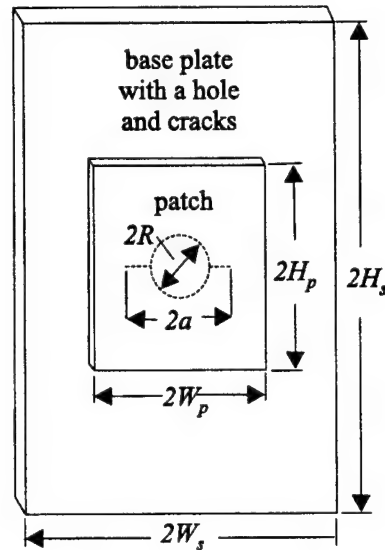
Schematic of repaired cracks near a loaded fastener hole in a metal sheet
